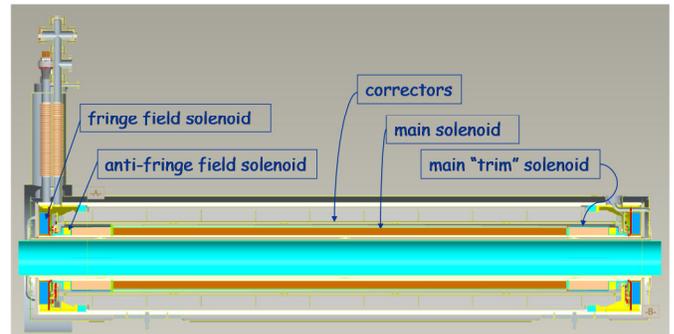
Cut-away drawing of the e-Lens superconducting magnet system.
